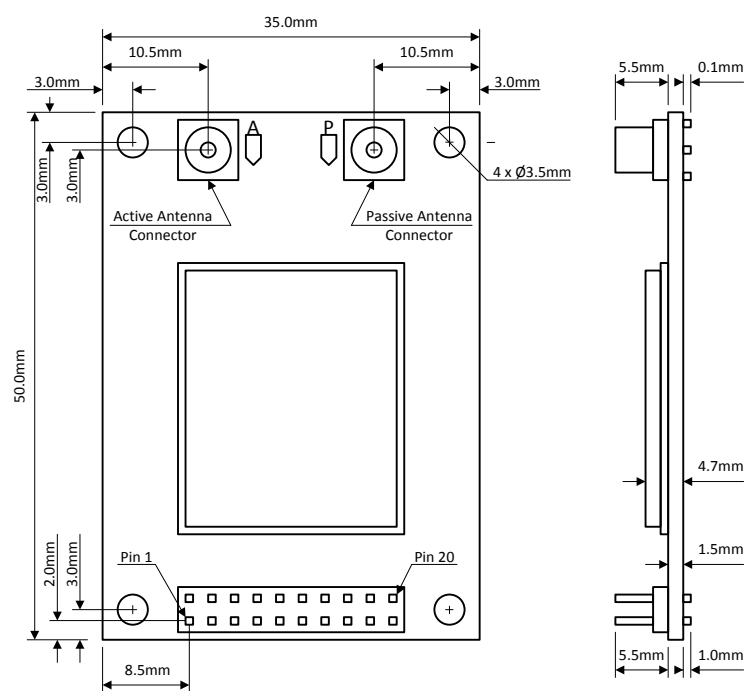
NV08C-CSM-BRD Card Outline Drawing
